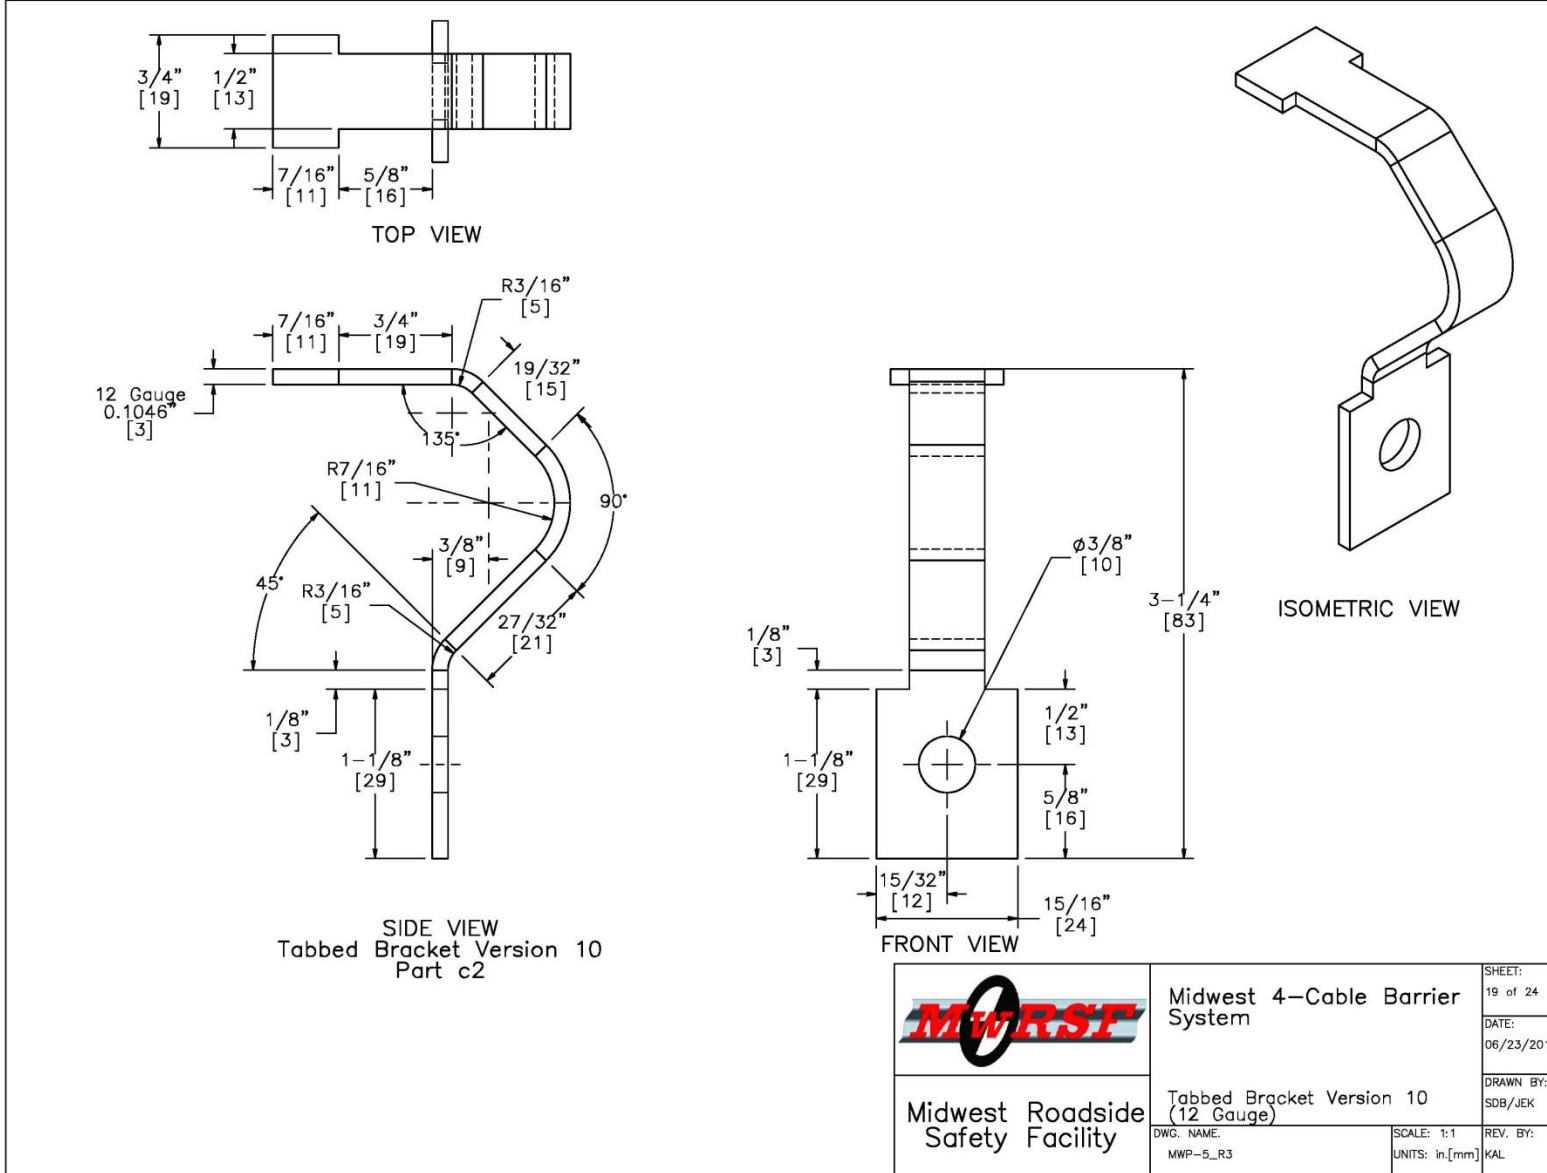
Tabbed Bracket Details, 12-Gauge, Test No. MWP-6
